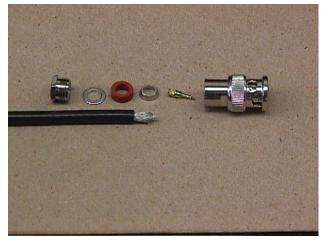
A stripped cable end and components of the BNC connector, from left to right: nut, washer, rubber compression ring, cone, center pin, and connector body. A 3-mm long section of the cable is stripped to the inner conductor, and an additional 6-mm length has the outer insulation stripped from the outer braid.
